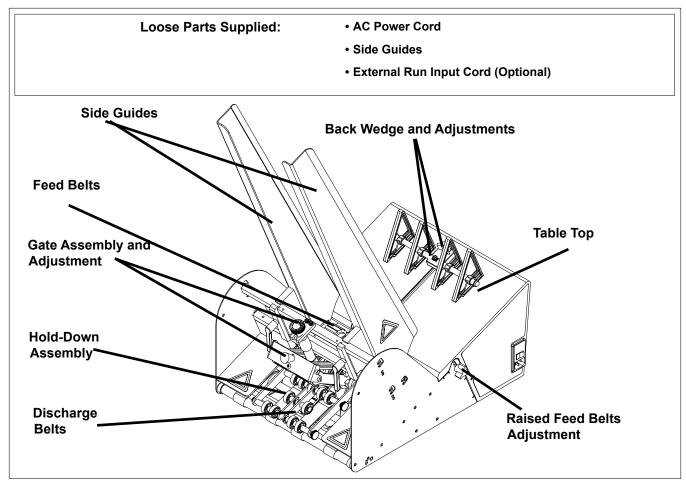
Main Assemblies of the V-710IJ Universal Friction Feeder
